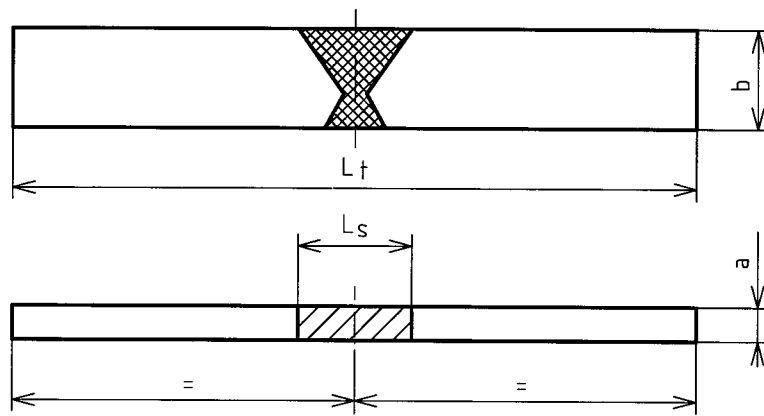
Transverse side bend test specimen of a butt weld (SBB)
